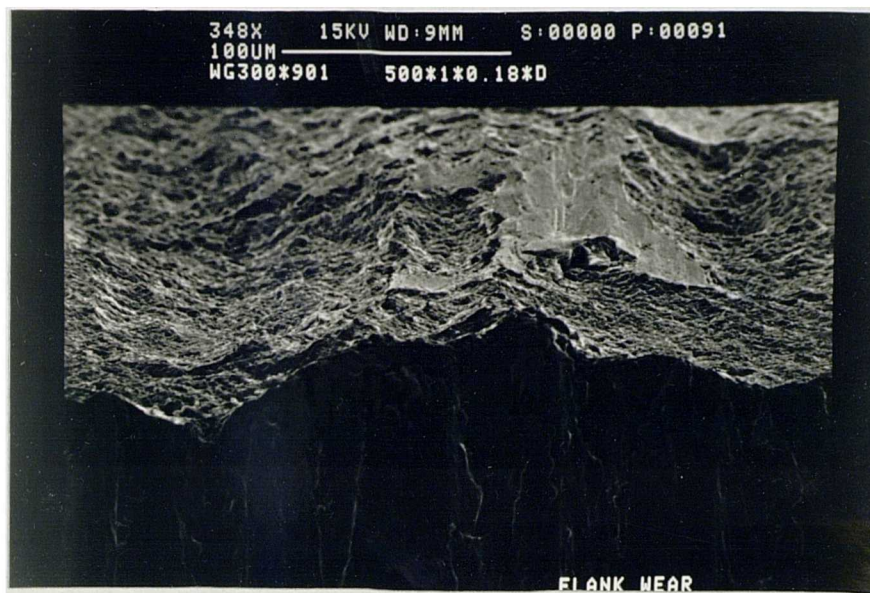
Flank wear of WG-300 used to machine INCO 901
